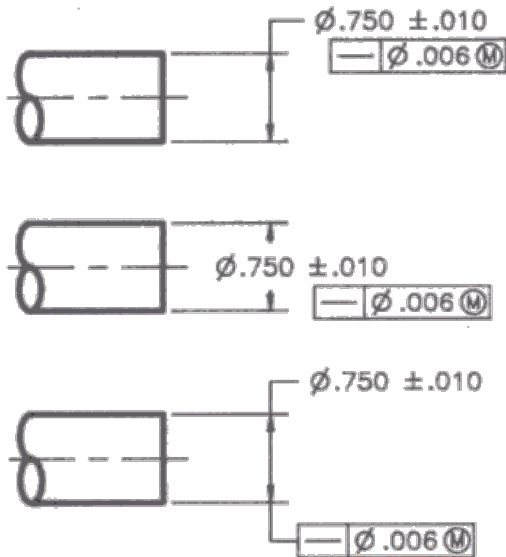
The axis of a feature can be controlled by placing a form tolerance adjacent to the size dimension or on the dimension line.
